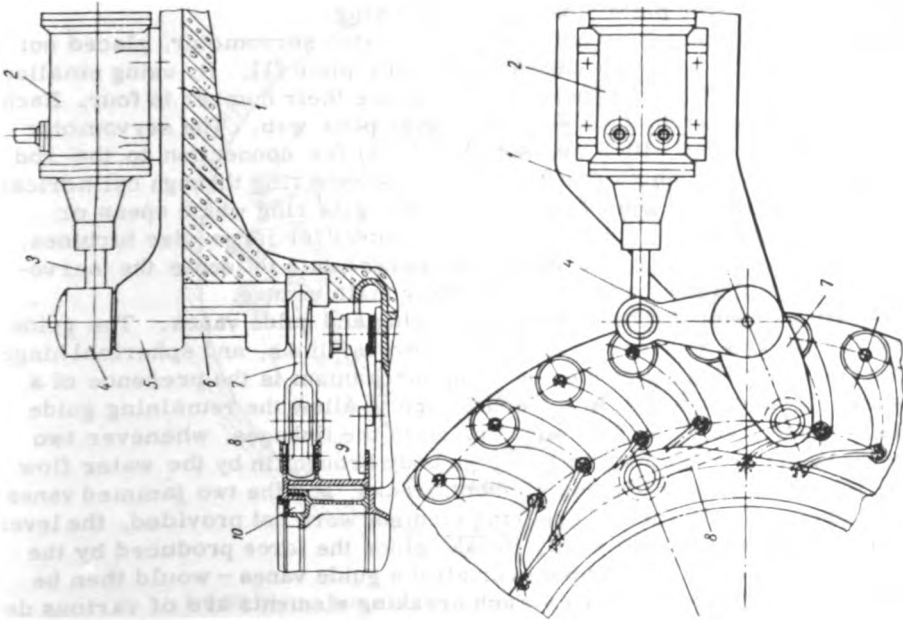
Distributor-actuating mechanism with one servomotor and one connecting rod
